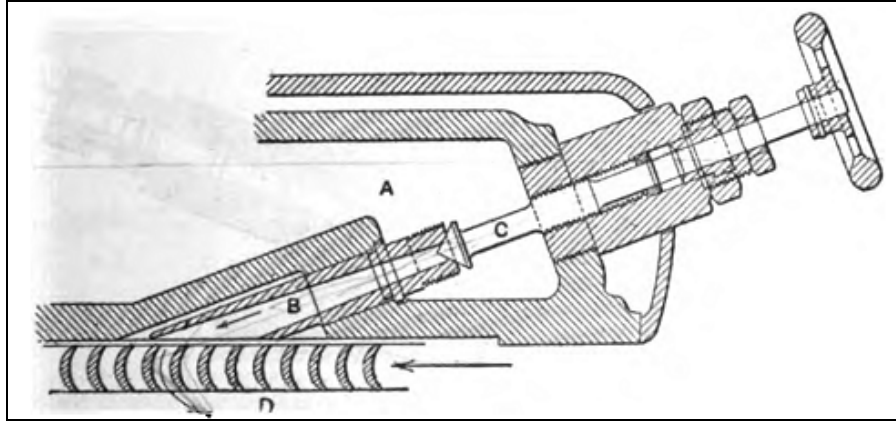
Patent Drawing of De Laval Nozzle and turbine wheel³.
